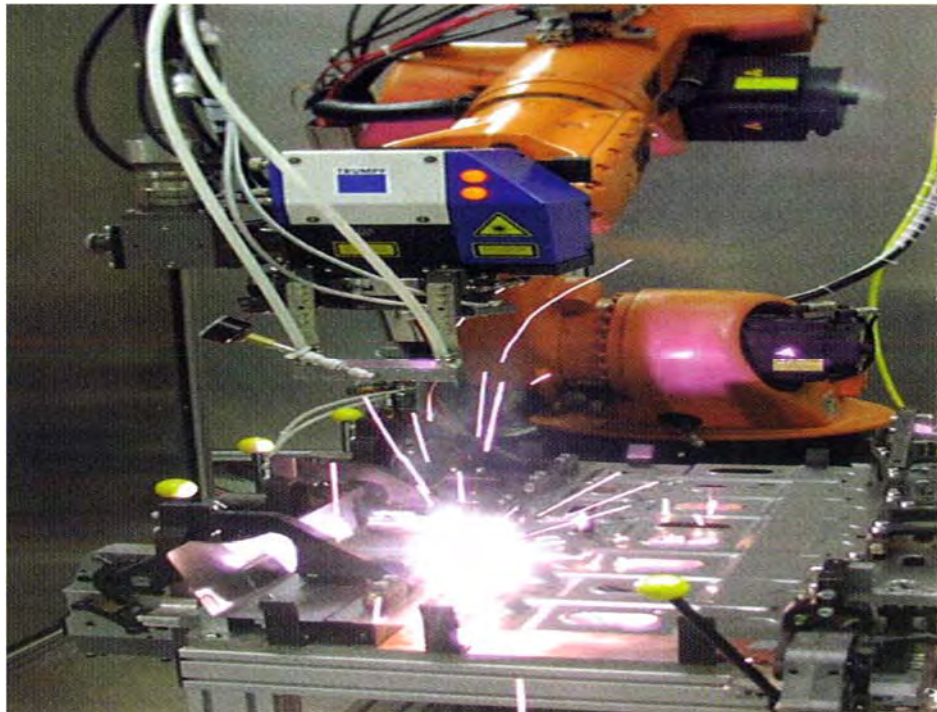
J-13: Remote laser welding of automotive applications^{T-9}
